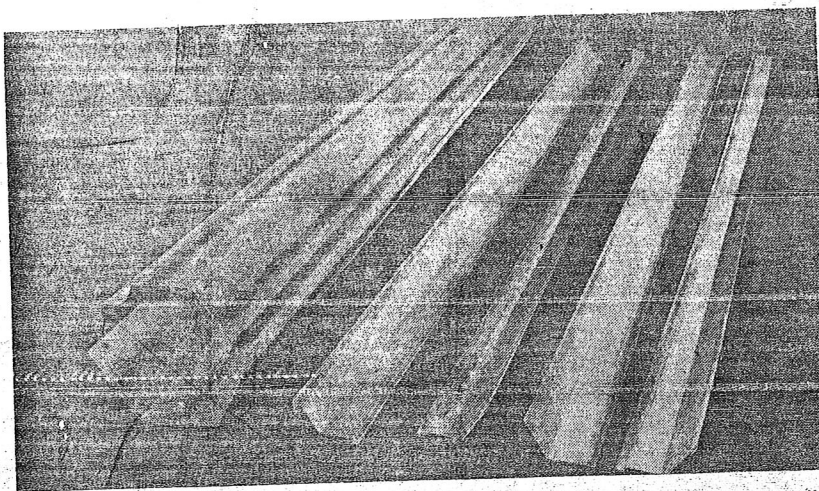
Zirconium tubes are each built from six pieces made as "straight-break" panels or "scalloped" panels. Panel preparation begins by blanking 0.035-in. stock into strips 6.5 in. wide by 124 in. long. Tool pin holes are punched on ends of blank in sections later trimmed off. After panel is formed at room temperature with profile dies in power break, panel is clamped in stress-relieving fixture accurately machined to desired shape. It is held at 1,040° F for 15 min and permitted to cool in fixture. The slight oxidation is removed by blasting with fine alumina
